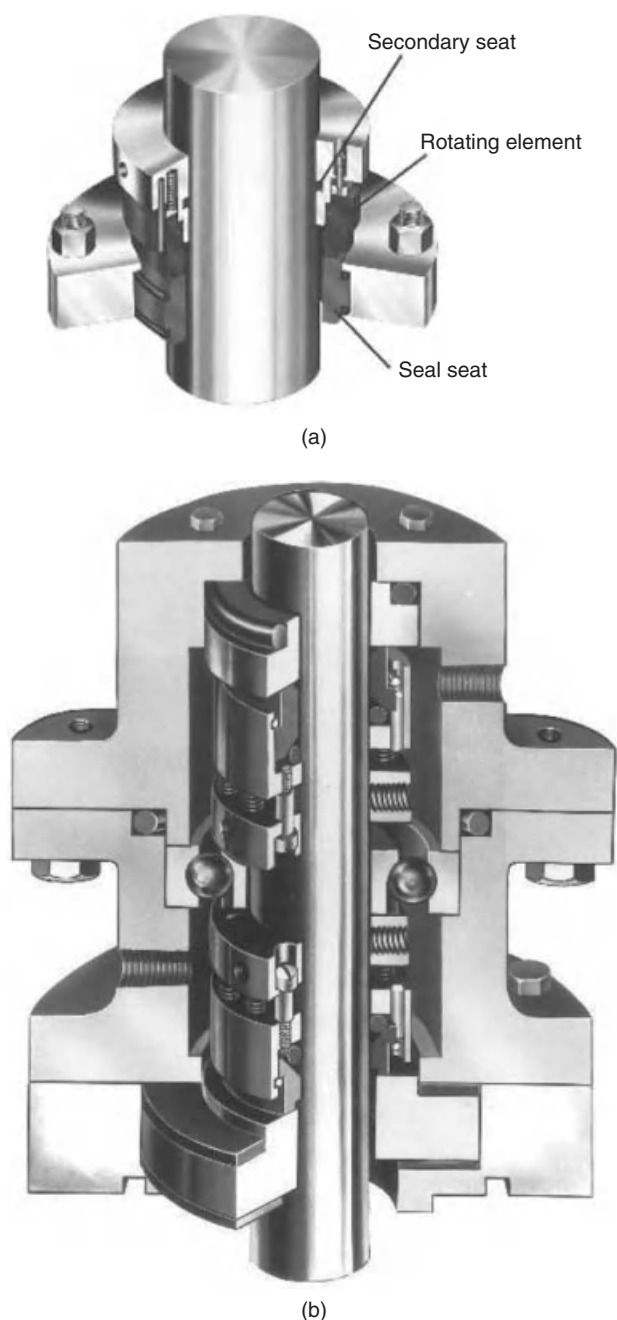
(a) Single mechanical seal; (b) double mechanical seal. (Courtesy of Flowserve.)
